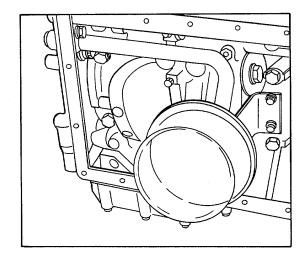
Typical Oil Pump Inlet Pipe and Screen Mounting
